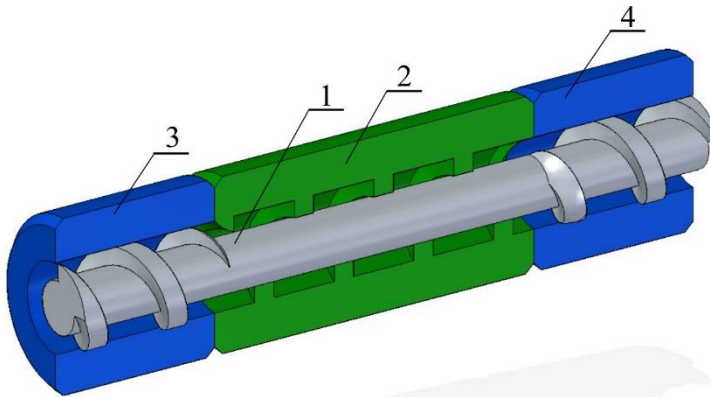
Longitudinal section of the plasticizing system with a rotational barrel segment and a screw without a flight on the length of the segment: 1 – screw, 2 – rotational barrel segment with a flight on the inner surface, 3 and 4 – immovable parts of the barrel
